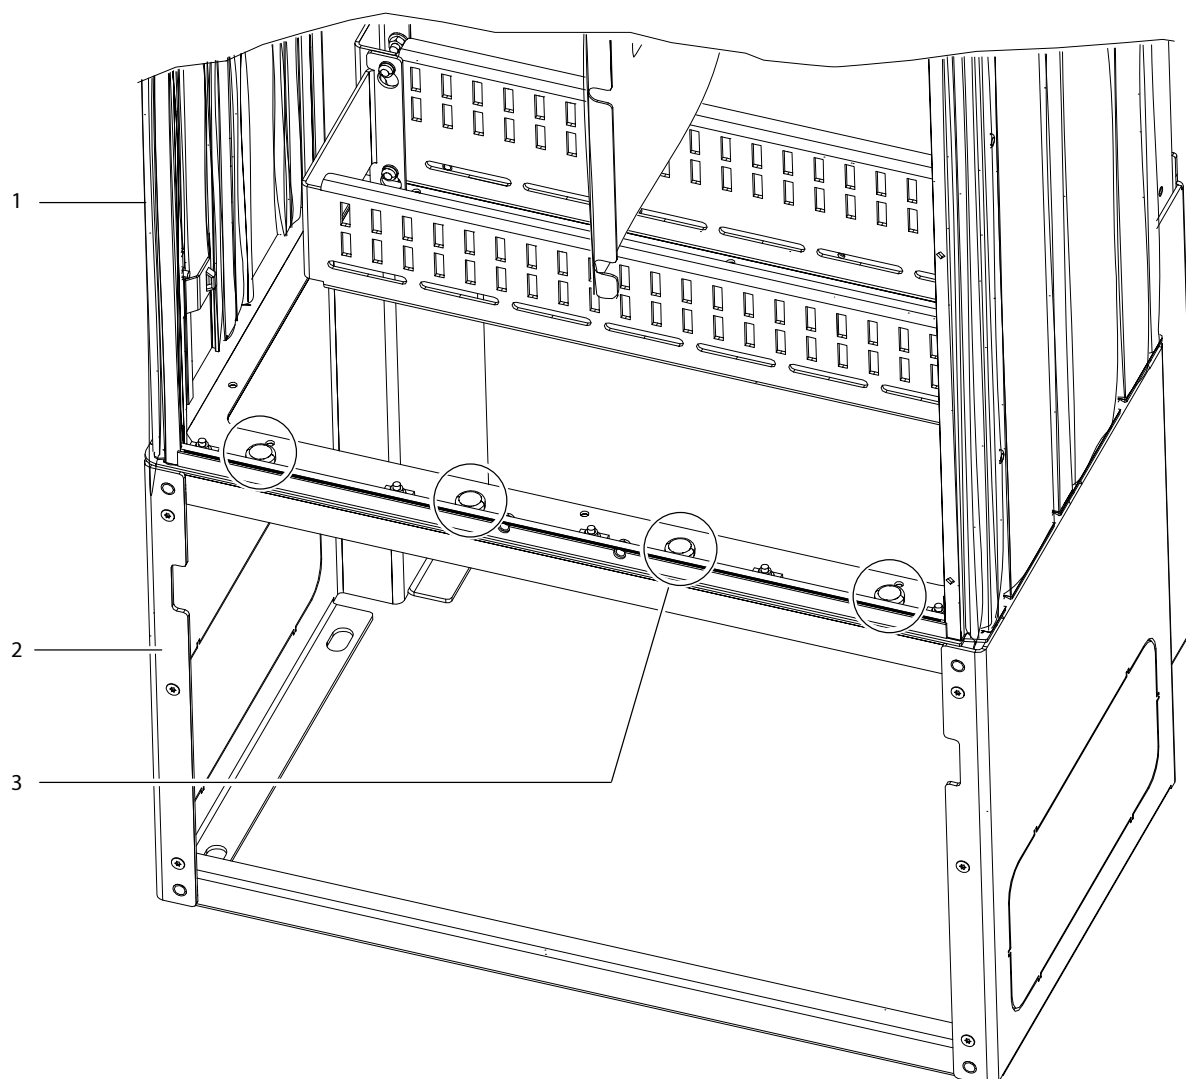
Pedestal-to-Cabinet Back Mounting Points
